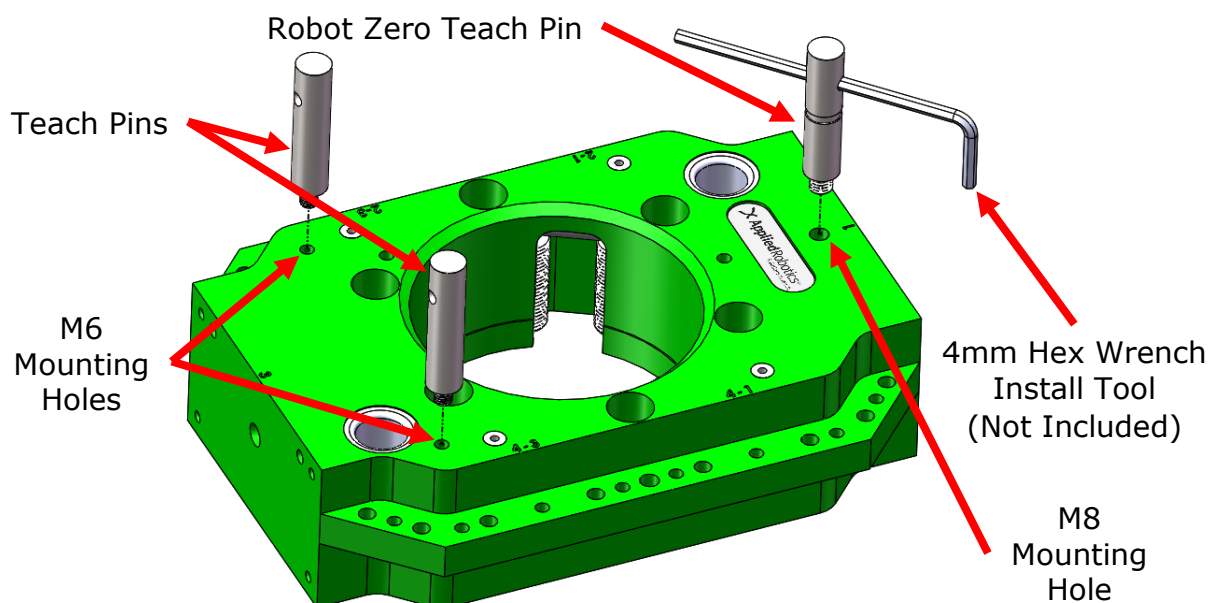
Teach Pin Mounting – E125 Tool Side
